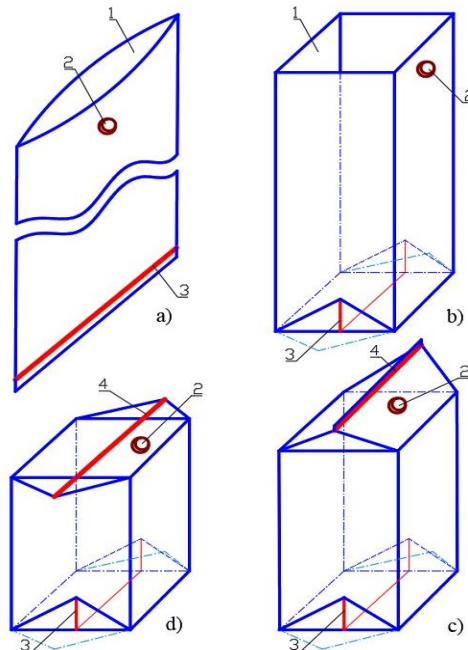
Flexible container manufacturing procedure, where 1-loading neck of the flexible container; 2- back valve; 3- welded joint of the down base of the container; 4- welded joint of the up base of the container
